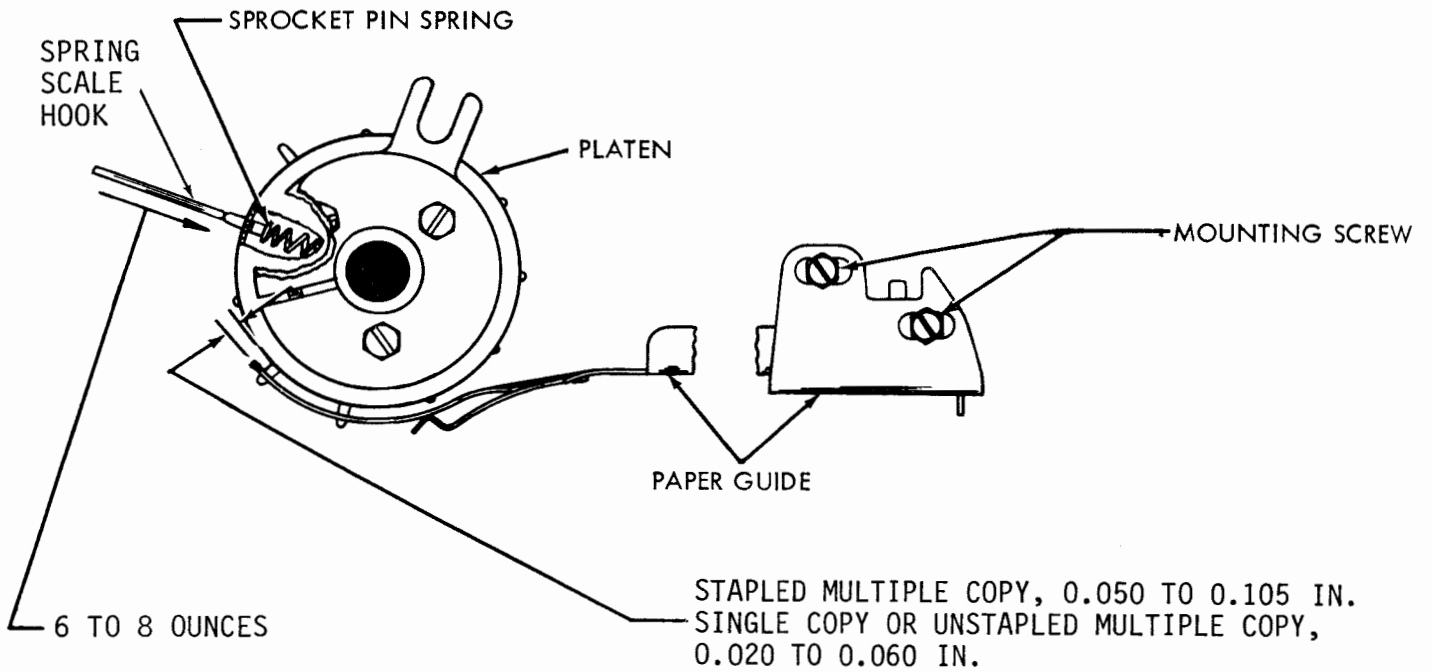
Paper Guide (Sprocket Feed) and Sprocket Pin Spring
